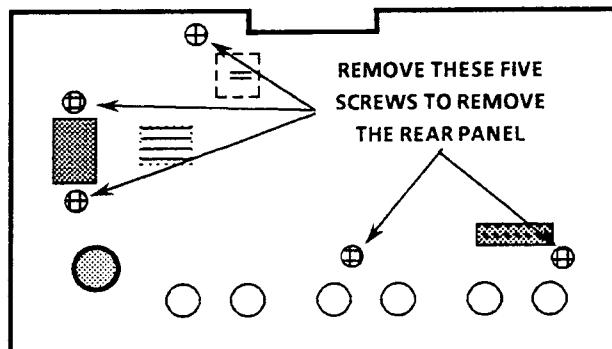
Screws that need to be removed to remove the rear panel.
